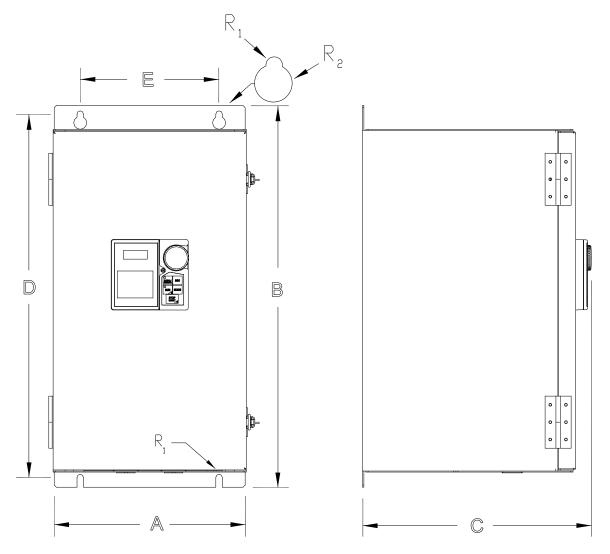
See Tables 17 and 18 for Actual Dimensions.
